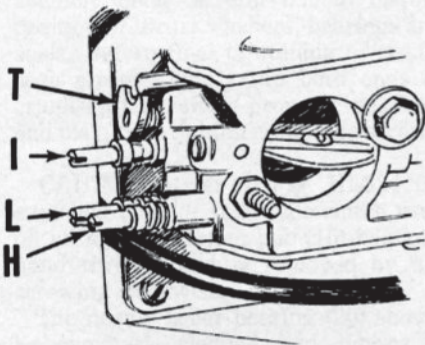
View of carburetor adjustment screws. Refer to text for adjustment.
